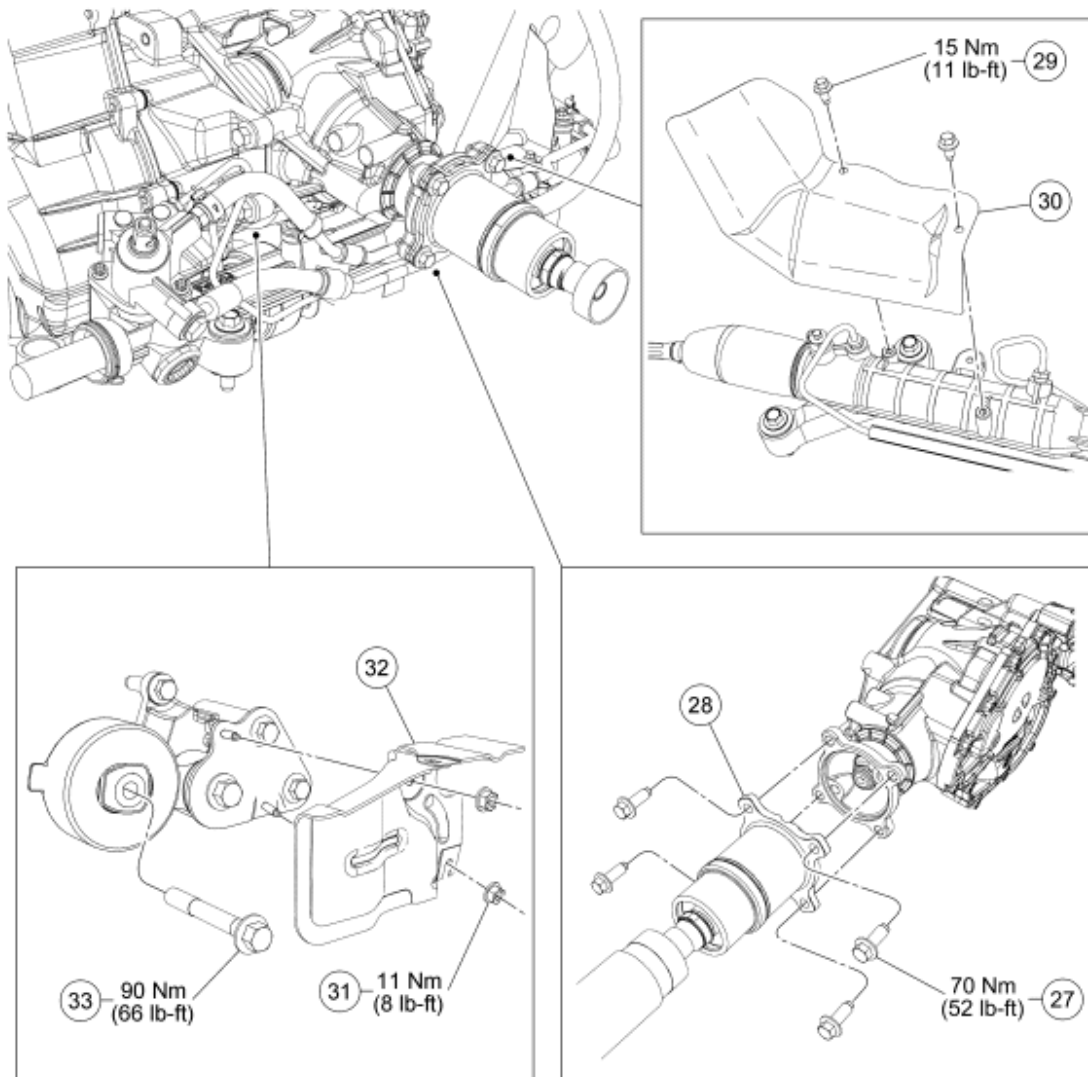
Exploded View Of Exhaust System With Torque Specifications (2 Of 3)
